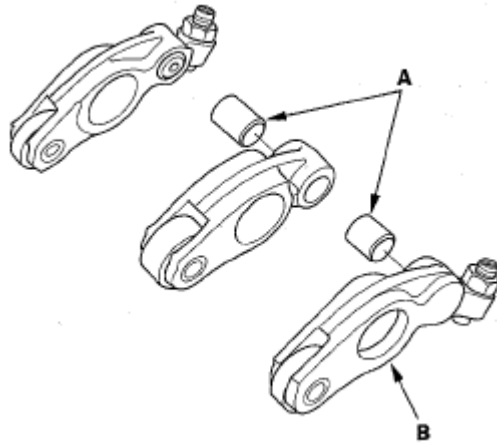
Identifying Rocker Arm Rocker Arm Pistons
